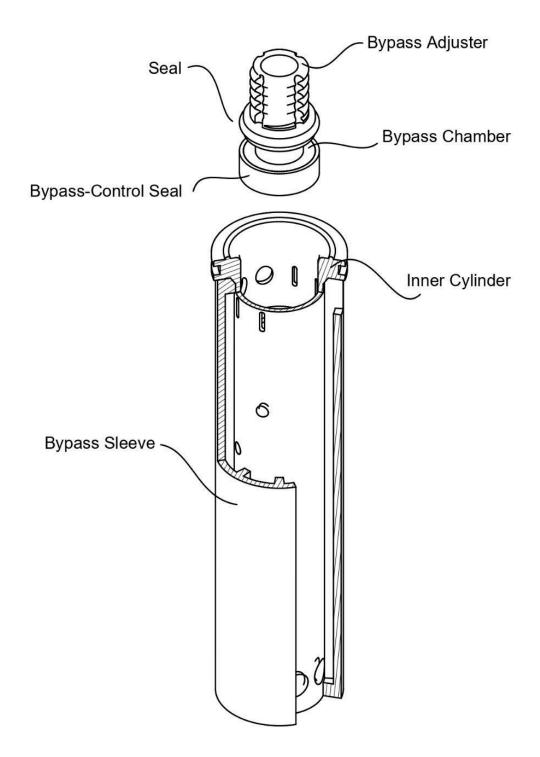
Exploded cut-away view of the piston cylinder and sleeve and the bypass adjuster with the seals that create the bypass chamber.
